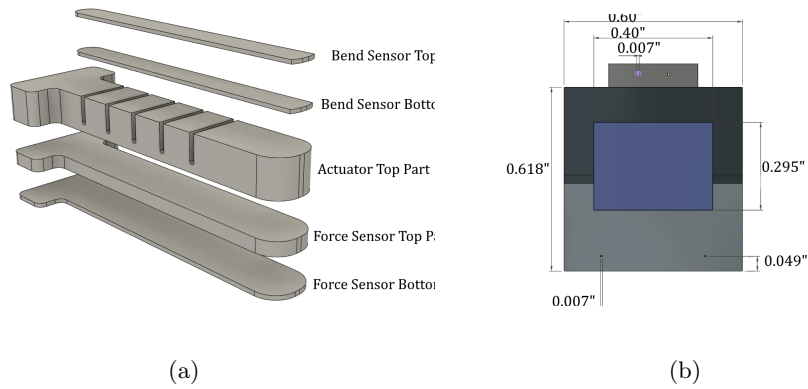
The left image(a) shows how the initial prototype was made using 5 layers of silicone elastomer which required 5 separate molds while the right image (b) shows a cross section of the actuator which details the dimensions of the sensor channels.
